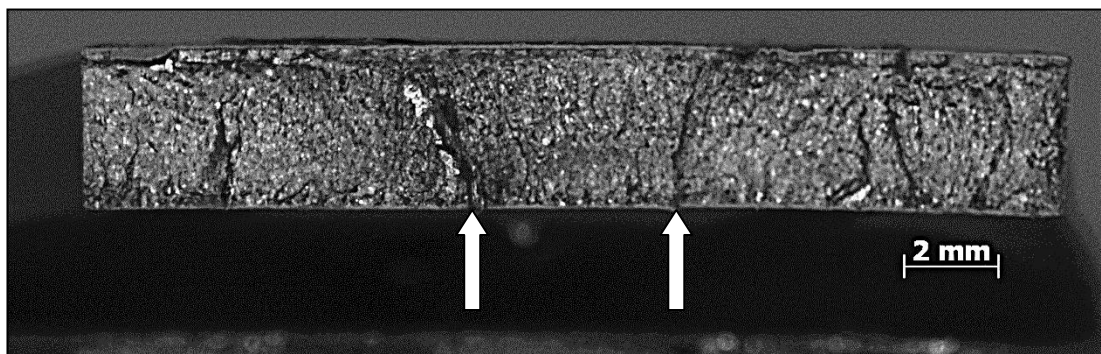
Indication of fatigue failure of laser-mechanically formed specimen
